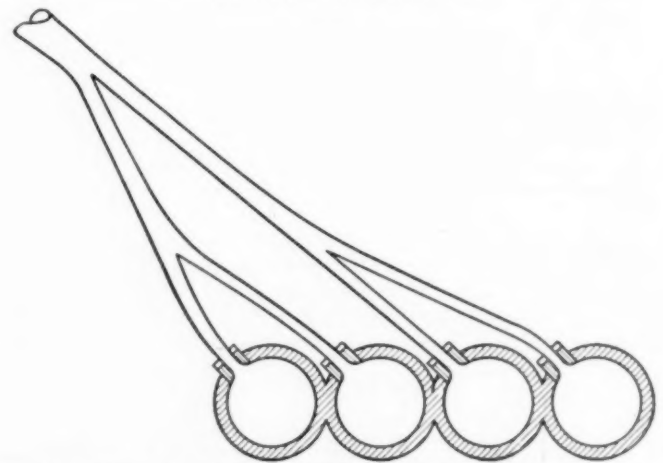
PAIR OR PARALLEL ARRANGEMENT OF NOZZLES IN MULTI-CYLINDER ENGINE
